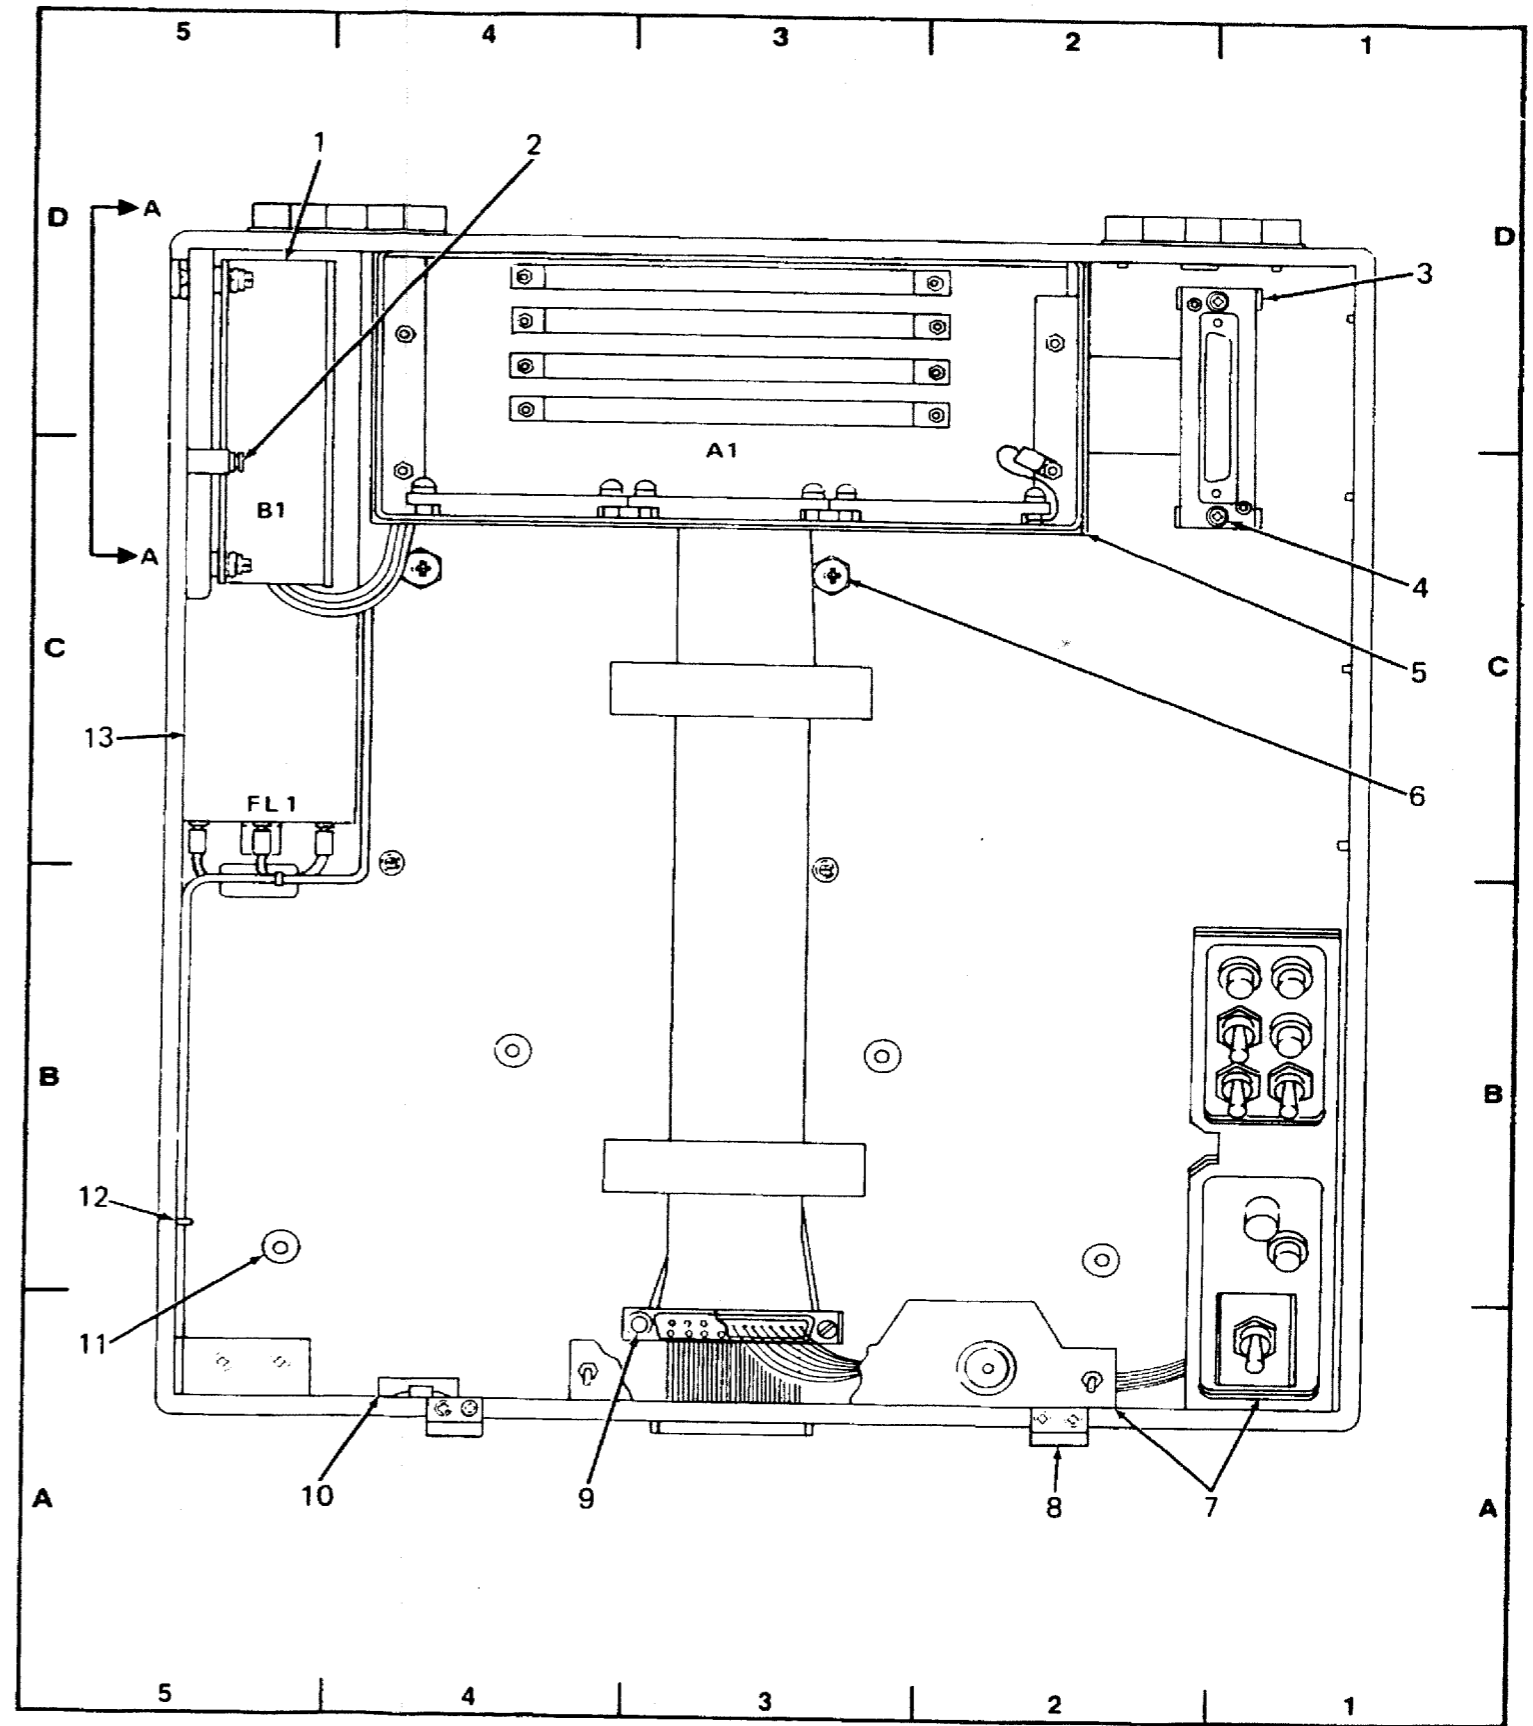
Teleprinter Chassis Assembly (Sheet 1 of 2)
